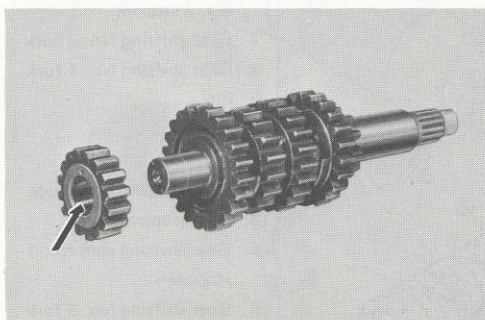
Apply SUZUKI LOCK SUPER "103Q" to this bore.
